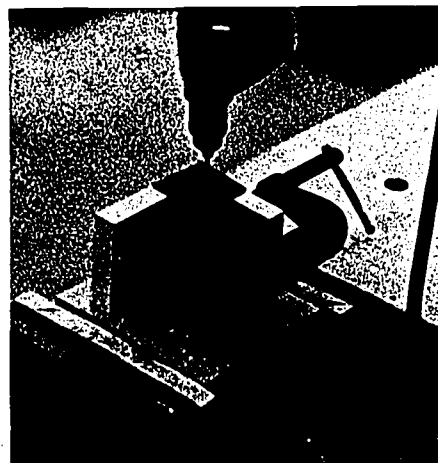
C-3. Using a Drilling Fixture to Accurately Locate Outlet Holes in the Salt and Pepper Shakers
